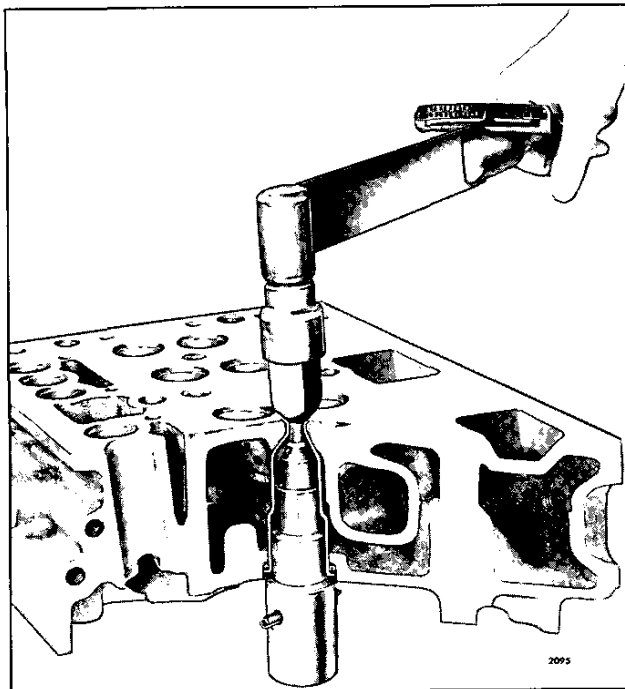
Upsetting Injector Tube Using Tools J 5286-4A and J 5286-6
